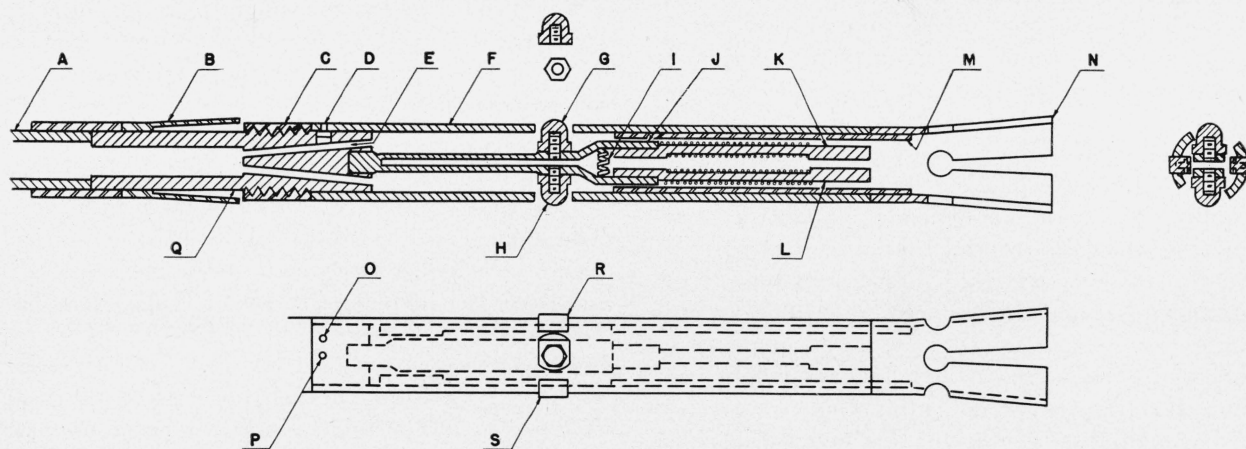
The top drawing is a cross section of the gage, and the bottom drawing is a schematic diagram of a view taken approximately at right angles to that of the top drawing.
